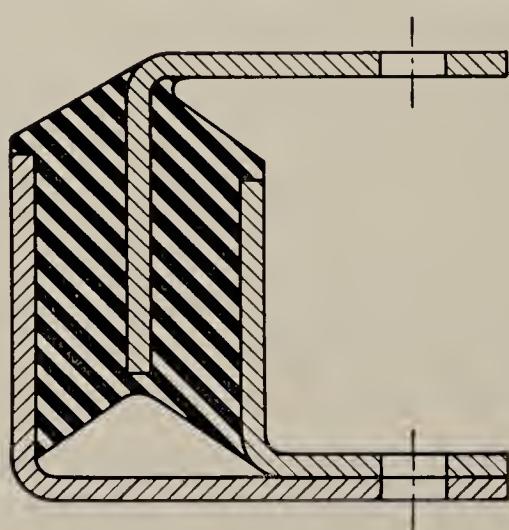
Three-angle type of mounting using rubber in shear.
